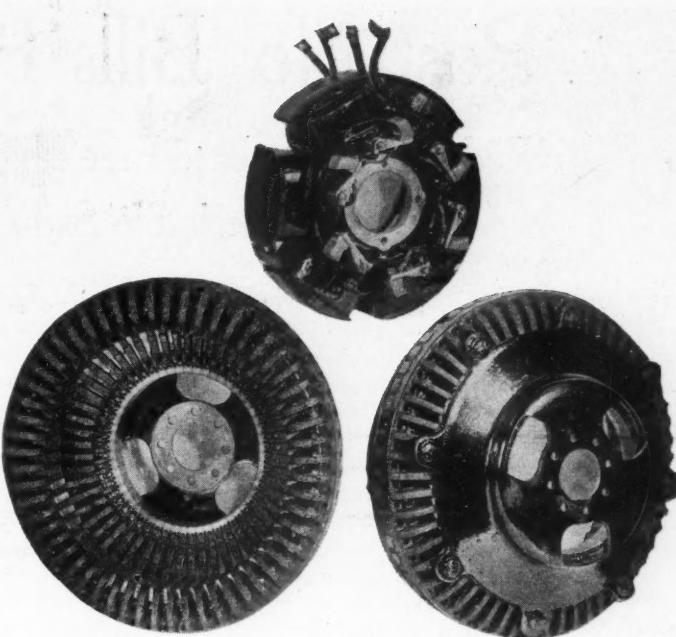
Component parts of U. S. L. system. A combined motor and generator is used in this system
